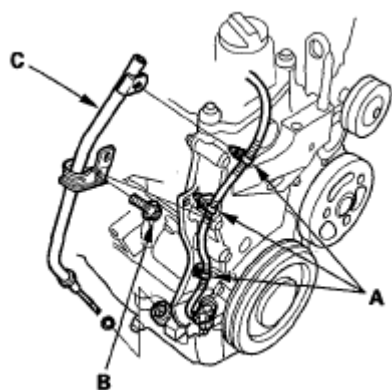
Locating Harness Clamps, Mounting Bolt & Dipstick Tube
